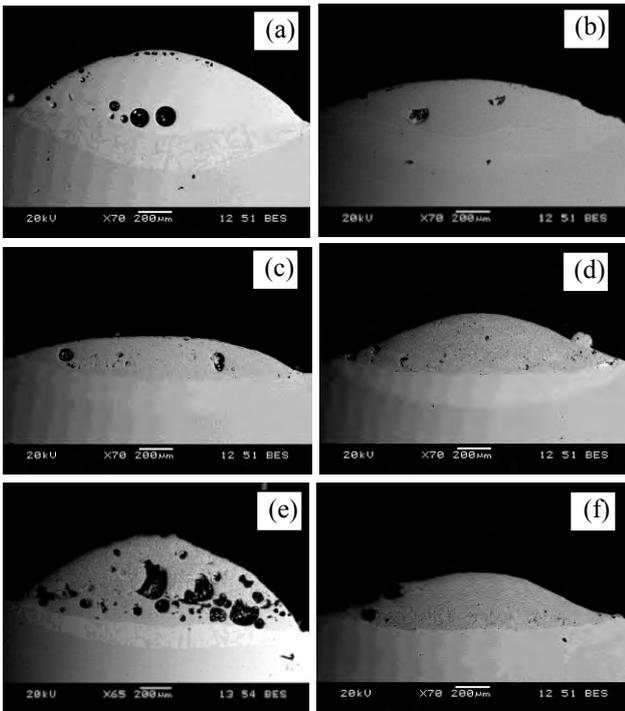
The Geometrical Shape of Sample Piece Cross Section
